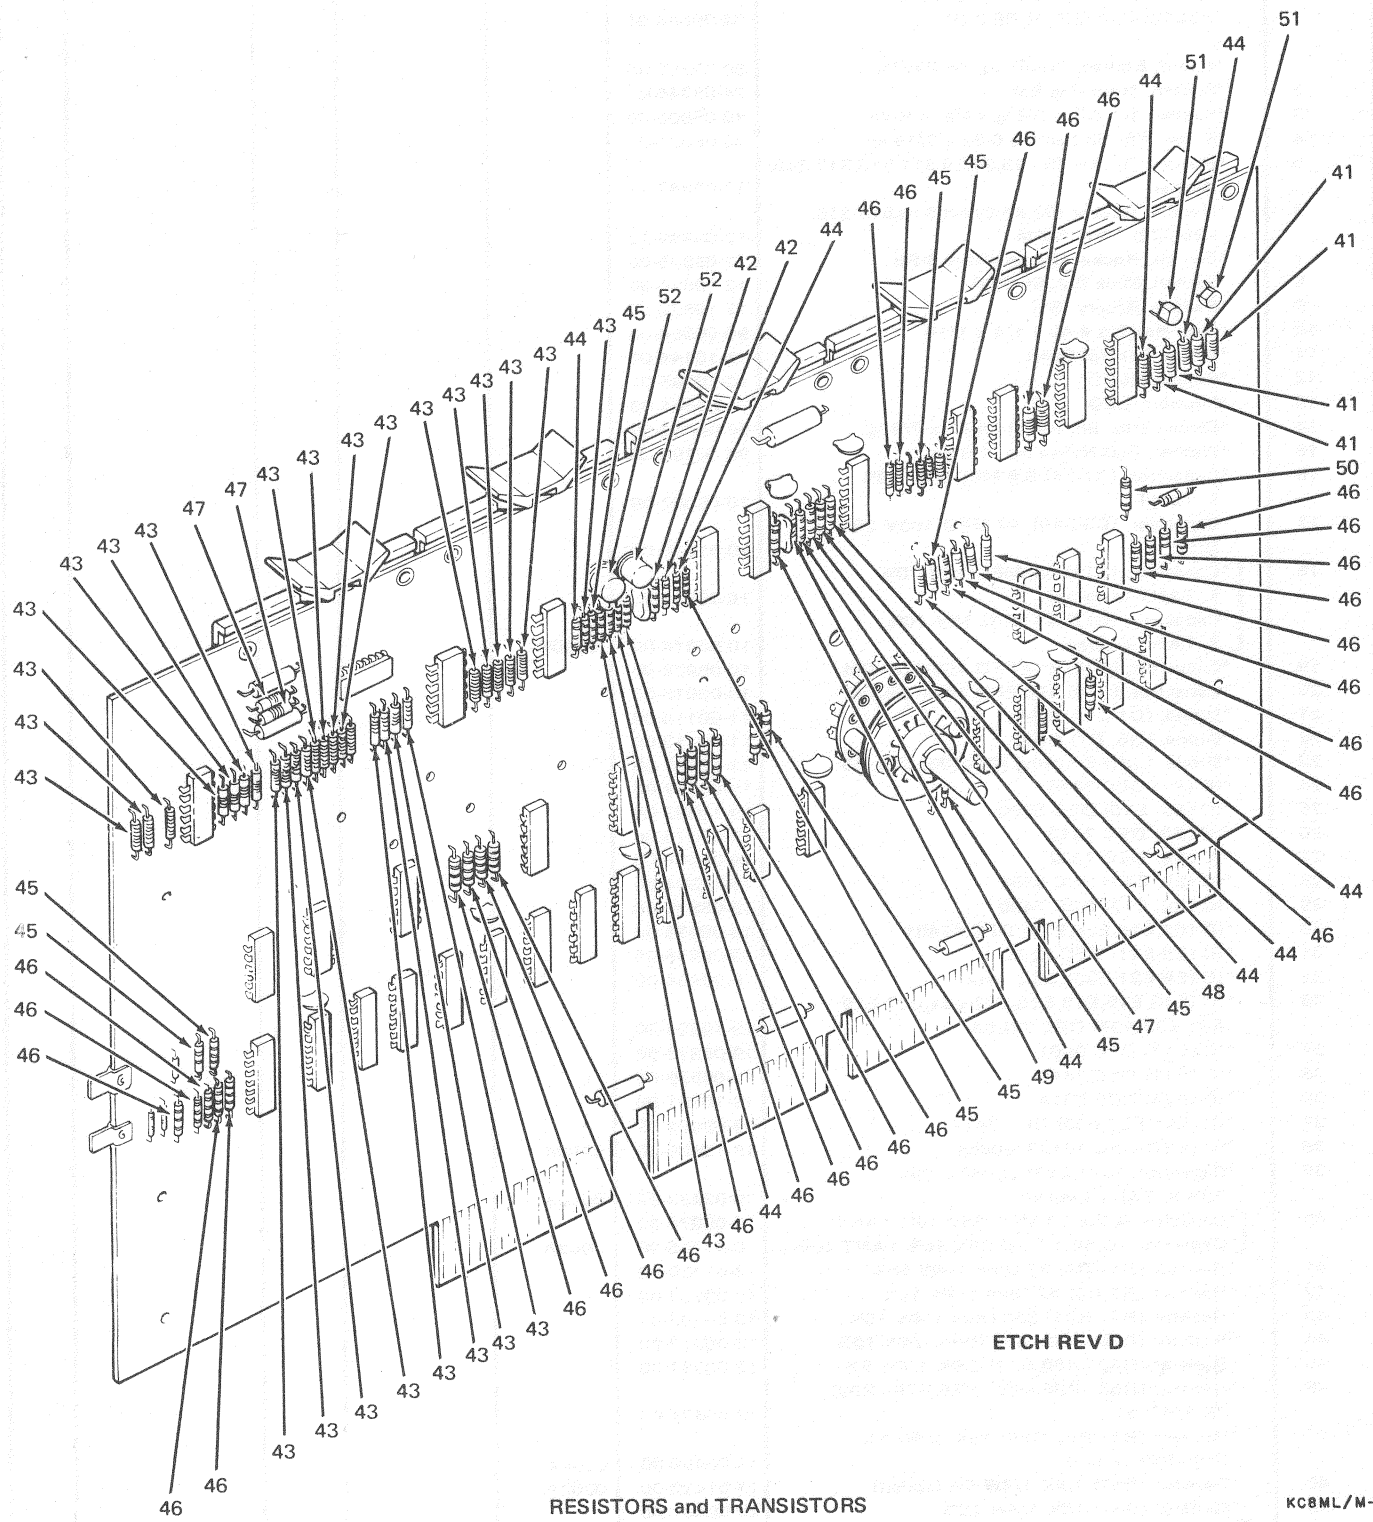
Front Panel Control Board Assembly (Etch Rev D) Sheet 2 of 3
